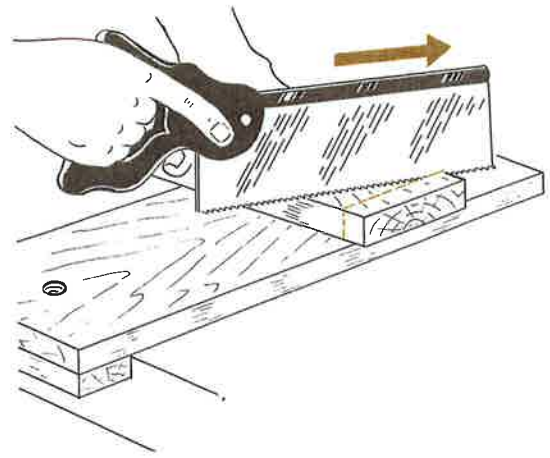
Sawing a board to length with a backsaw on a bench hook.
